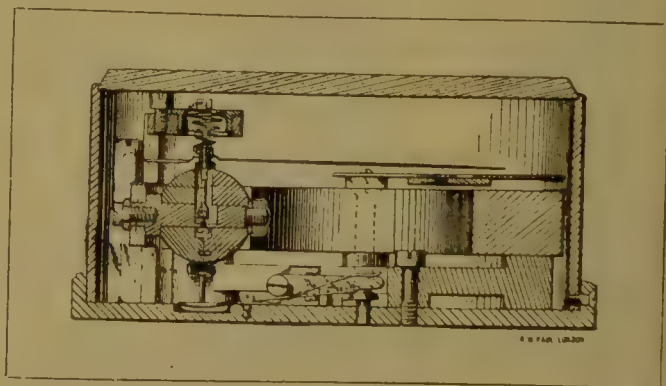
Section of Paul's Moving-coil Galvanometer.
